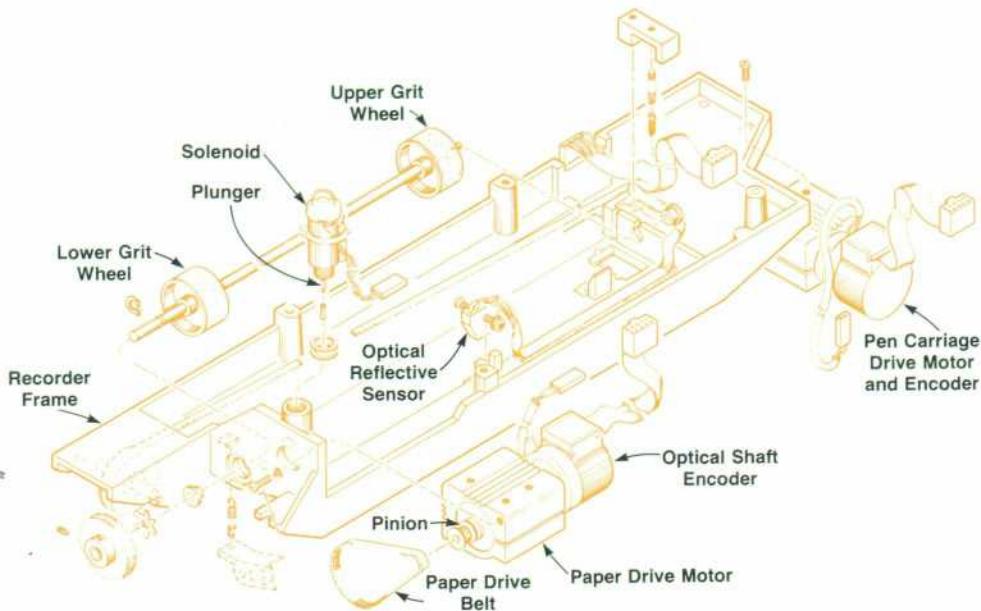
Paper drive mechanism. The paper is moved along the Y-axis by two grit-covered wheels located on opposite edges of the paper. These wheels are driven by a digitally controlled dc motor.
